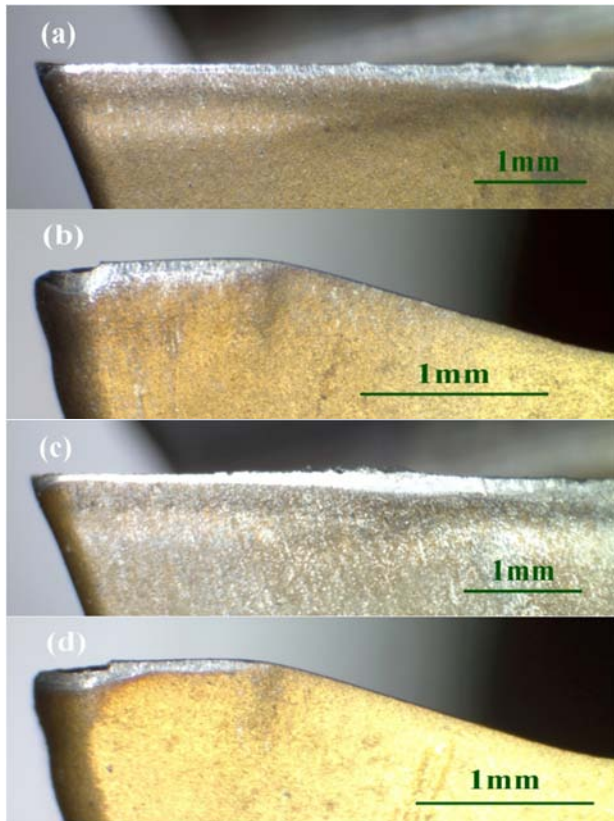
Tool wears versus tool life when high speed machining using the Nano Turbo Insert F40M grade type carbide tool at different feed rate and cutting speed 200 m/min.
